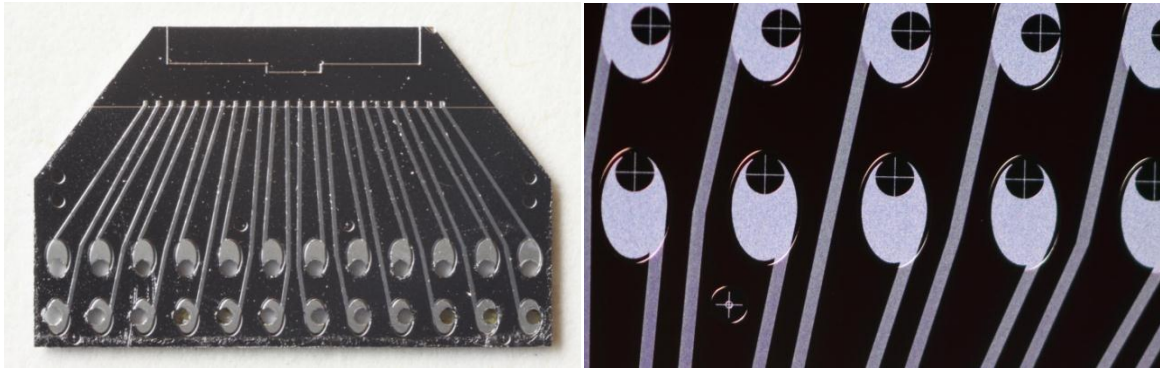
Left: Quad shaft electrode carrier with through holes and alignment groove, the electrode surface is passivated with oxide layer, Right: Exposed pads with through holes drilling cross-hair markers
